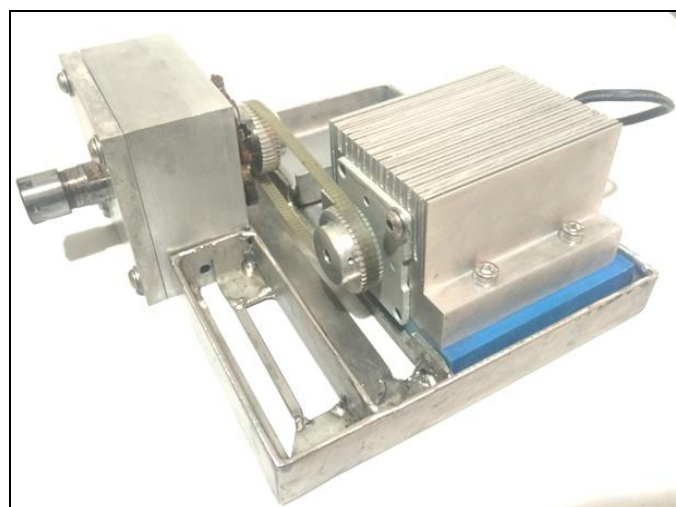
The actual final assembly of rotary axis mechanism for ultrasonic WEDT.
